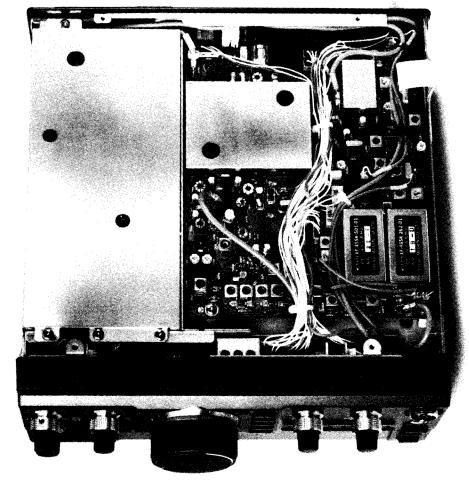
The FT-890, here with its bottom cover removed, is fairly typical of modern radios: Most of its circuitry resides on two main chassis-mounted PC boards, inside the finalamplifier compartment, and on another board behind the front panel. The two optional 455-kHz IF filters, at lower right in this photo, are soldered in place. Of the two, the SSB filter (at right) is difficult to install because you must first remove an existing filter.
